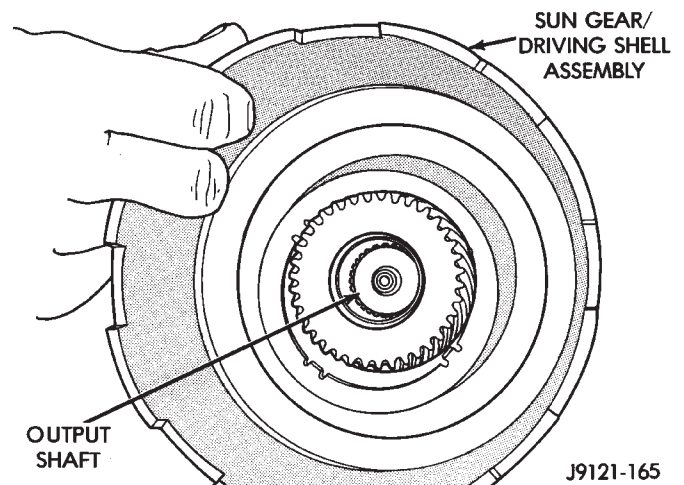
Installing Driving Shell Rear Thrust Plate
